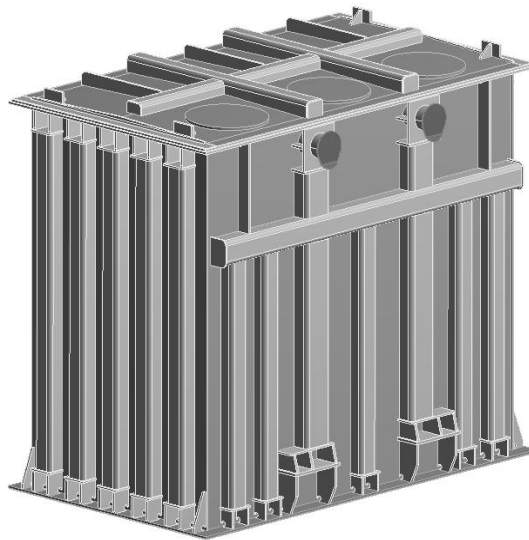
Updated tank layout of tank with additional stiffening ribs
